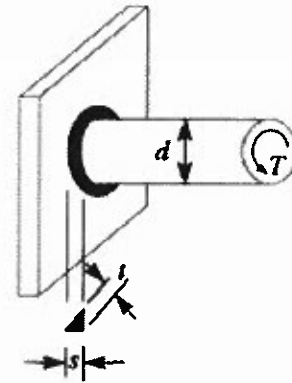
Circular fillet weld subjected to torsion.
